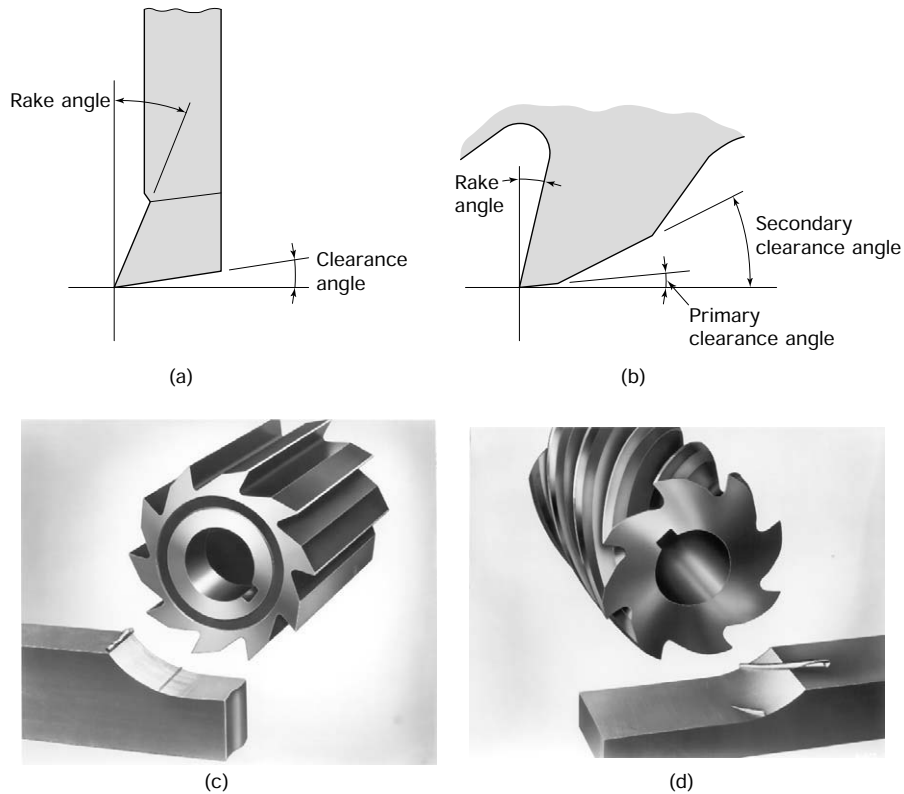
Milling cutter tooth angles: comparison of cutter angles for a single point cutting tool (a) and a milling cutter tooth (b); (c) orthogonal cutting (straight tooth) cutter; (d) oblique cutting (30° helical tooth cutter) (photographs reproduced courtesy of Cincinatti Milacron Ltd)
